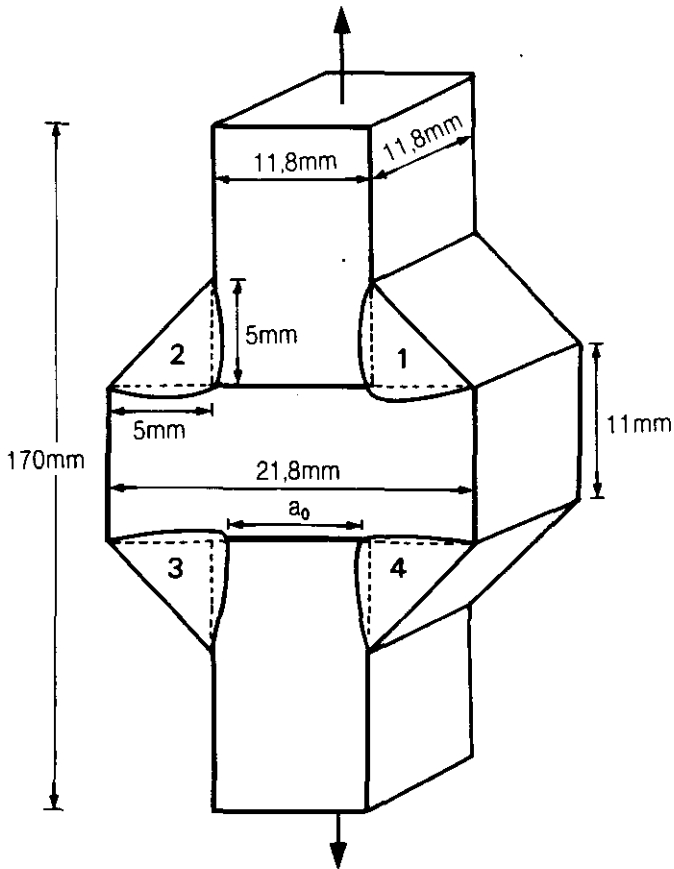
FLNFT test specimen design. a_0 is the artificial through-thickness crack length. The sequence of welding of the single bead fillet welds is also indicated.
